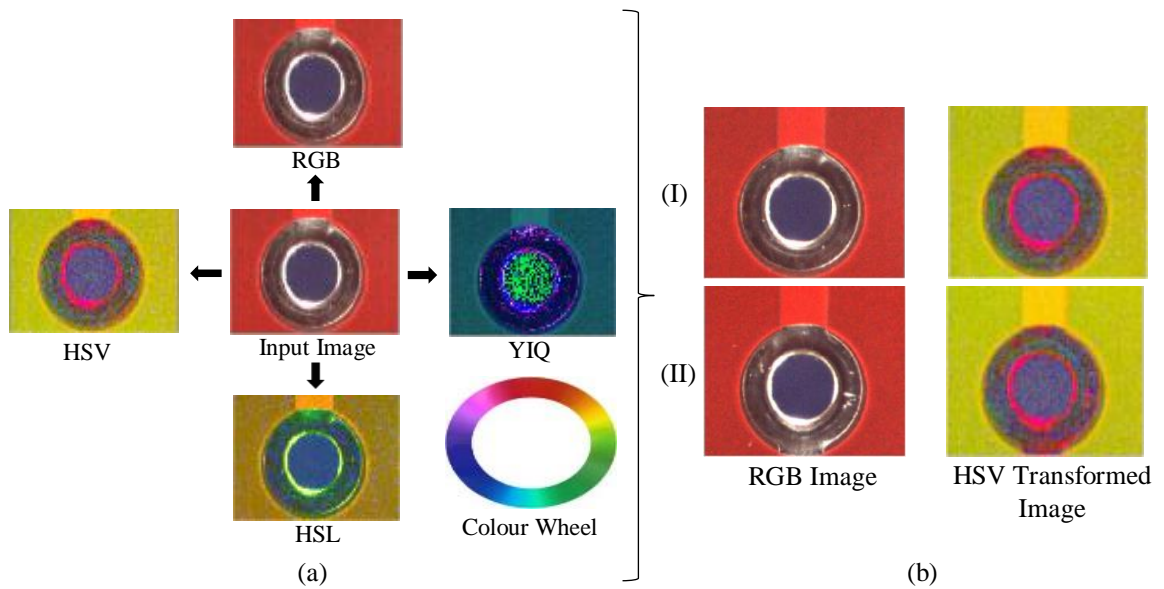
Colour space transformation of a tin-plated solder pad on red PCB. (a). Results from four prominent models for this combination. (b). Resulted HSV colour transformed images at different conditions. (I). Tin plated solder joint on a red colour PCB under less illuminated environment. (II). Tin plated solder joint on a red colour PCB under illuminated environment
